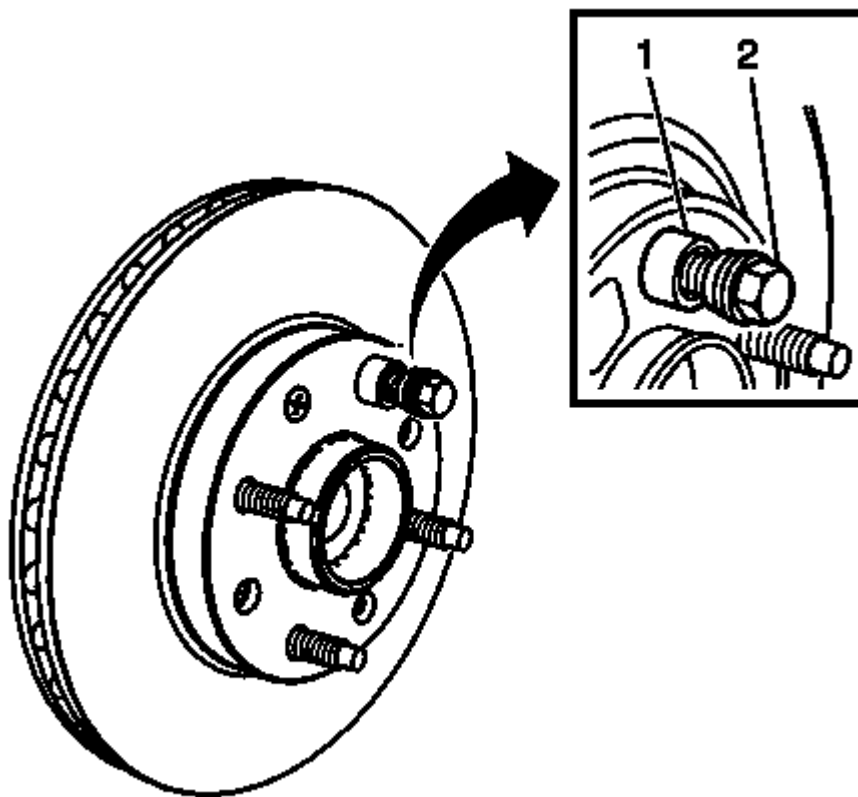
One Lug Nut & Conical Brake Rotor Washers
